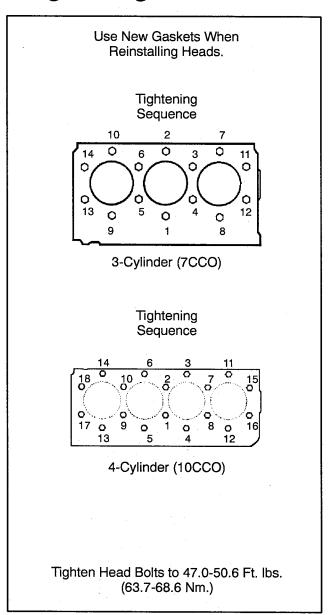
Cylinder Head Fastener, Tightening Sequence.
